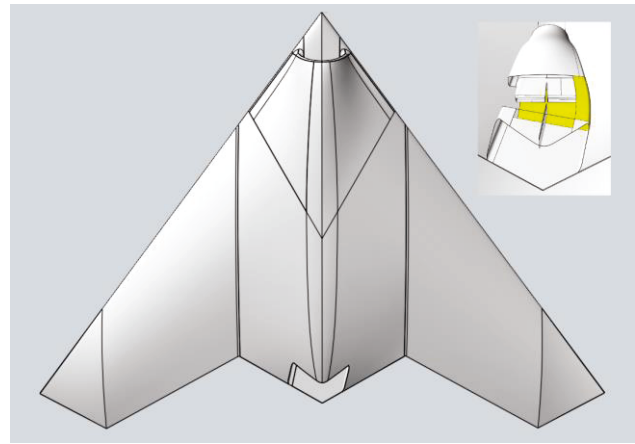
CAD drawing of the slewable mechanical nozzle, integrated in MULDICON, deflection angle (15°)
